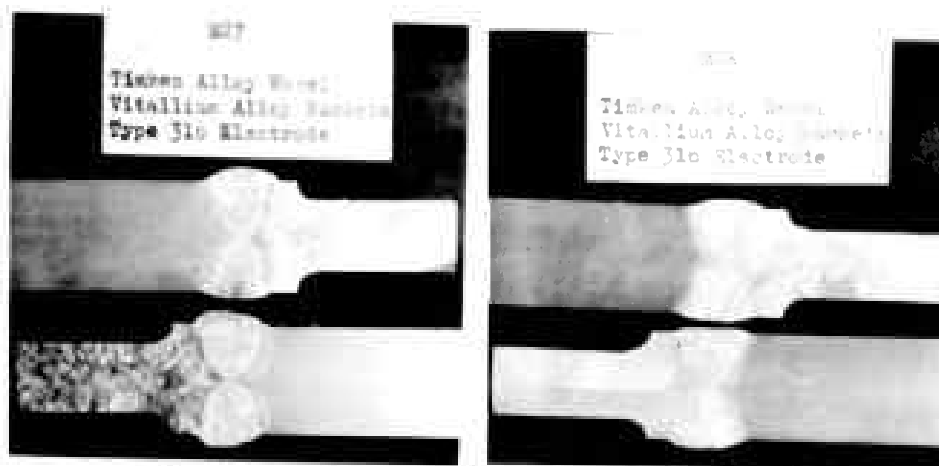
Typical Wheel-and-Bucket Design Test Specimens Welded by the Manual-Arc Process. As Welded Plate above, Macro Etch Specimens below.
